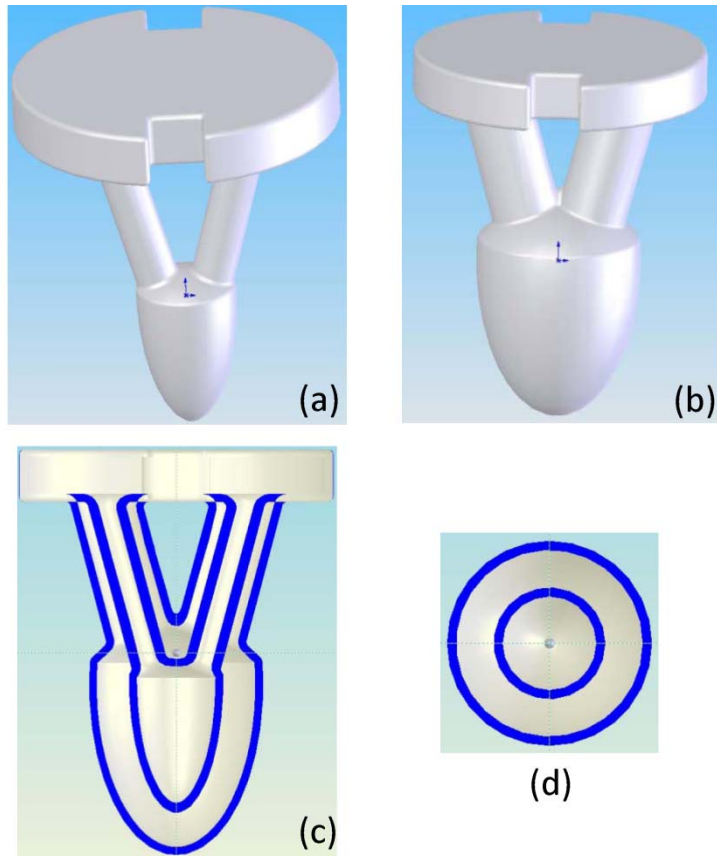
Sketches of the two positive molds drawn using Solidworks. (a) a solid positive mold for the inner surface; (b) a solid positive mold for the outer surface; (c) and (d) are cross sections of the assembled two positive molds in long axis view and short axis view, respectively.
